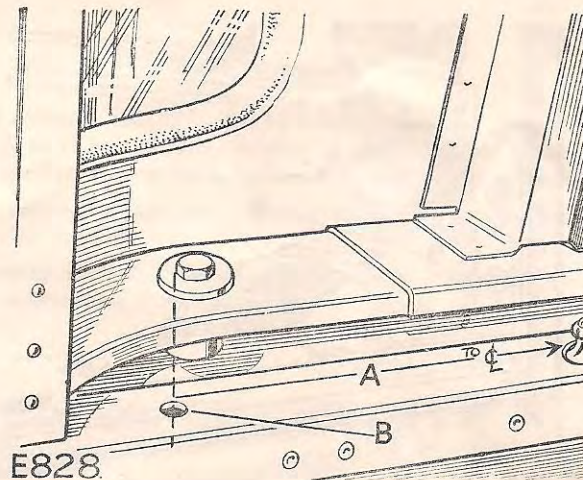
Showing position of safety harness fixing hole. R.H. illustrated.
